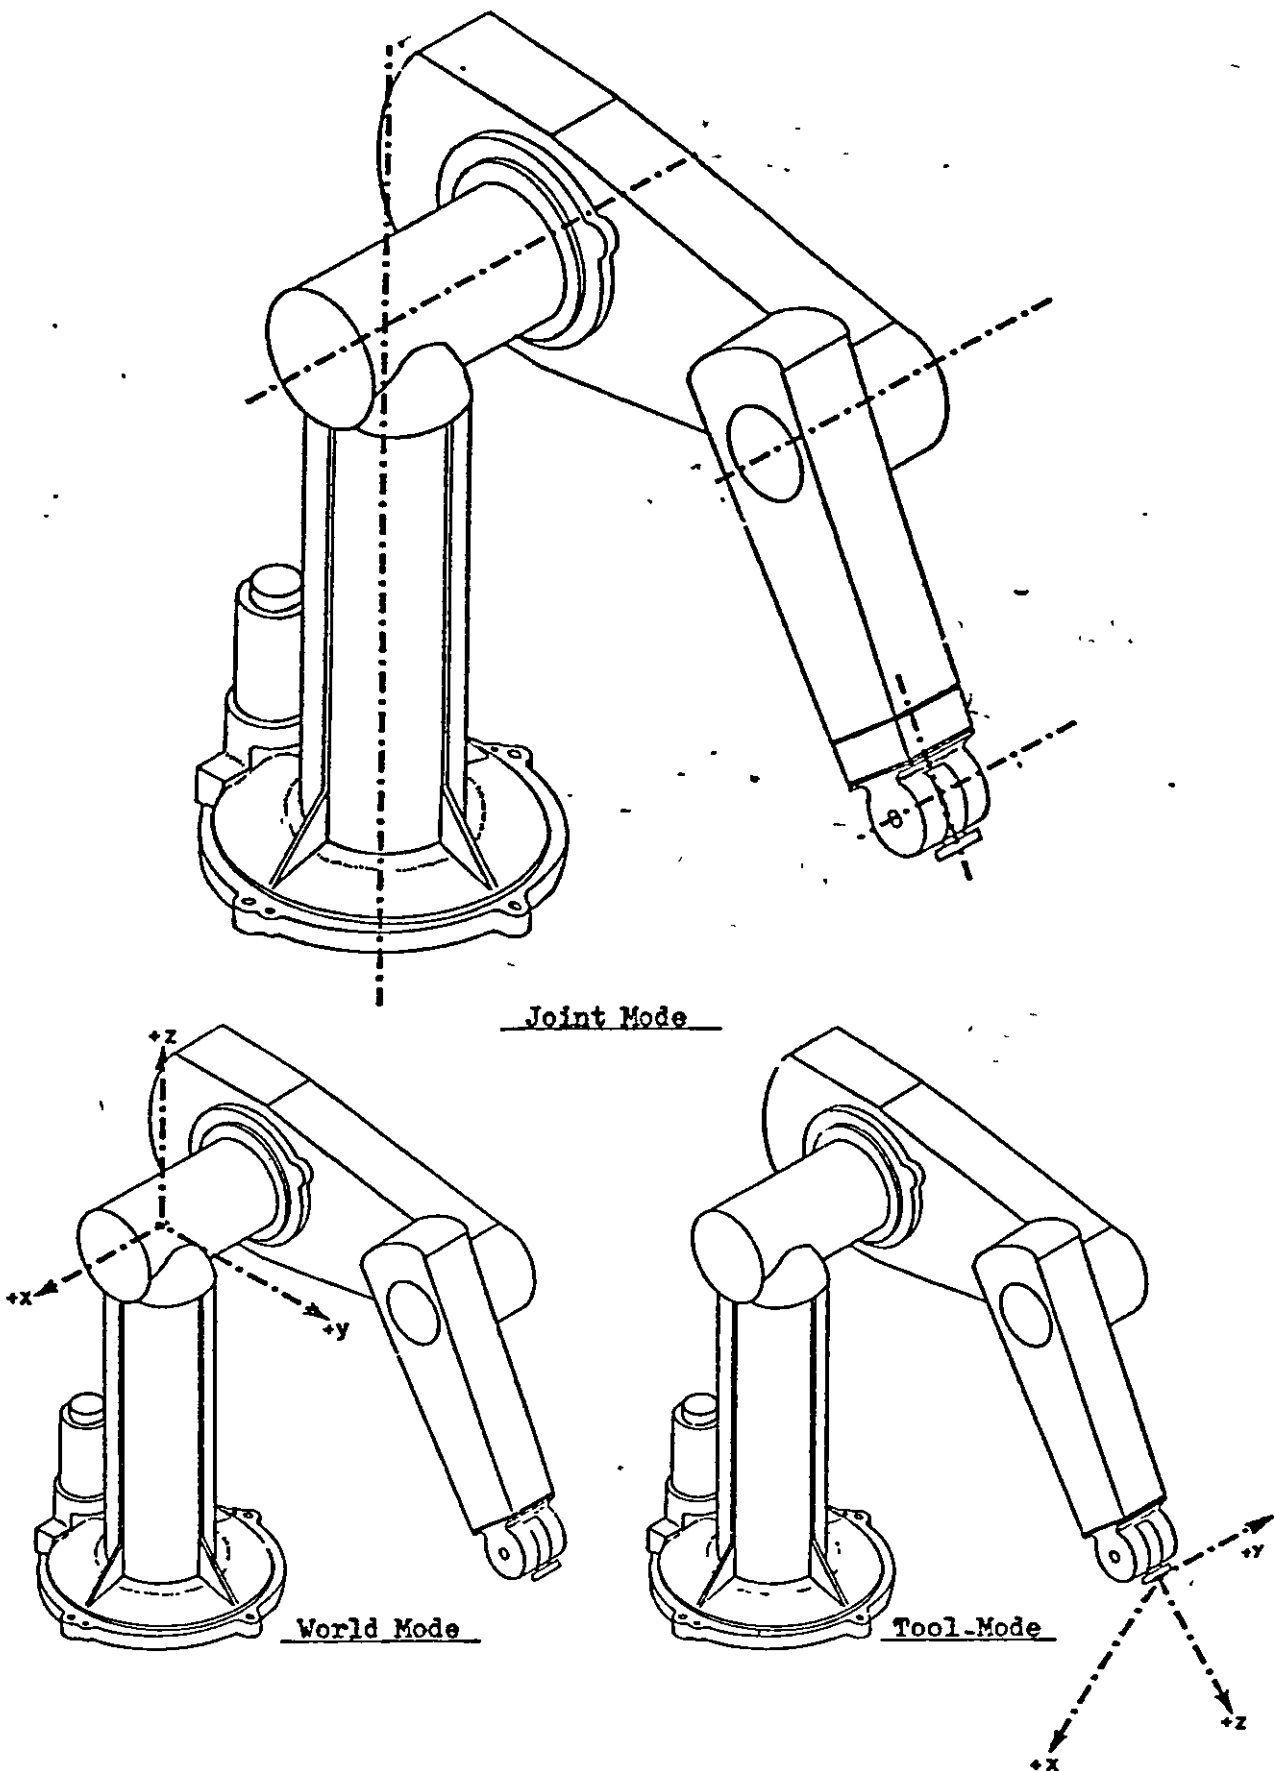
JOINT, TOOL AND WORLD MODES
